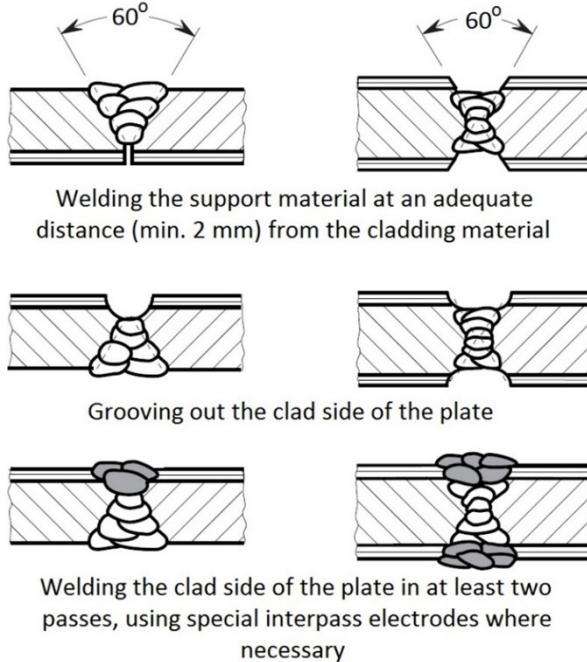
Weld shapes for welding of clad plates
